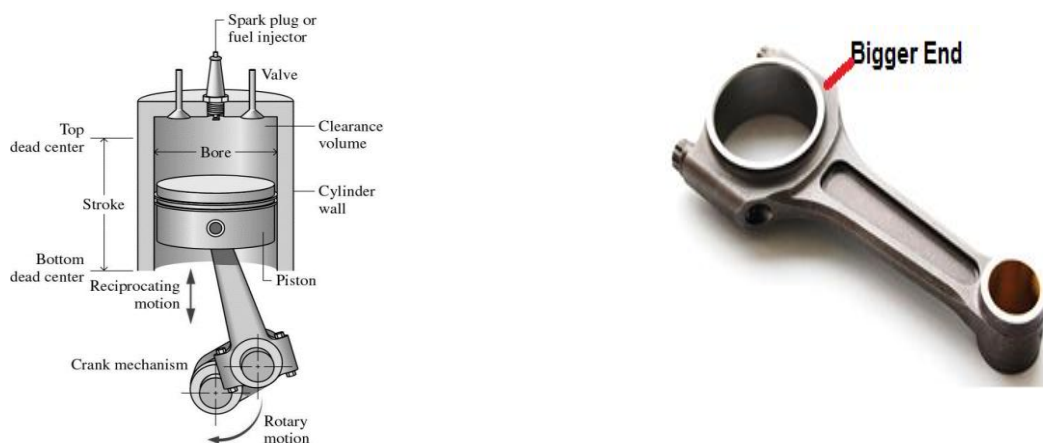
Assembly of Connecting Rod Fig. 2 Connecting Rod for Engine
